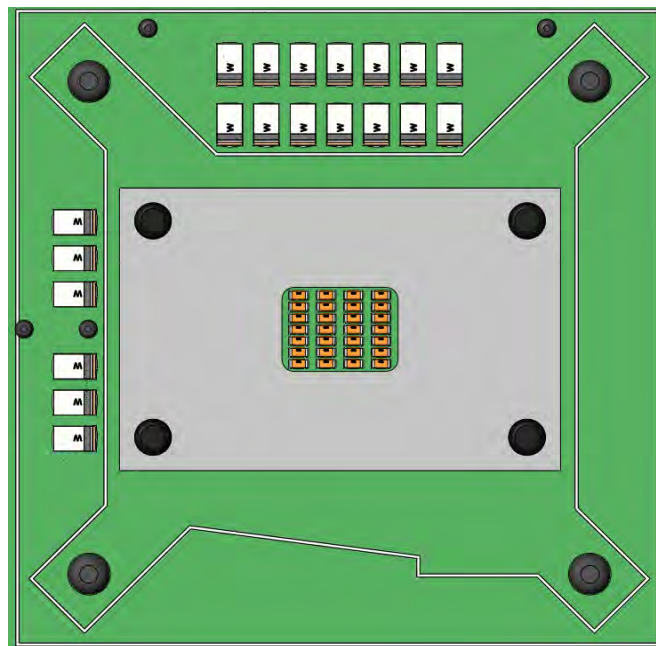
Bottom layer top view of a 4+2 phase VR layout arrangement. Ceramic capacitors located in the PCB heatsink window for ESL reduction. Low profile polymer electrolytic capacitors located on the sides of the PCB heatsink.
